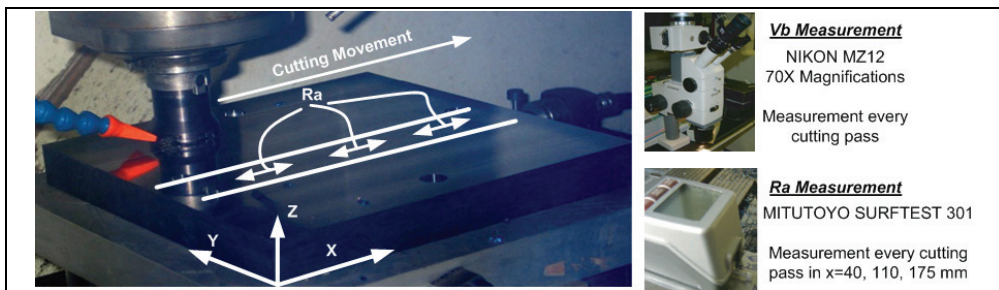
Machining process and surface roughness and tool-wear sampling.
